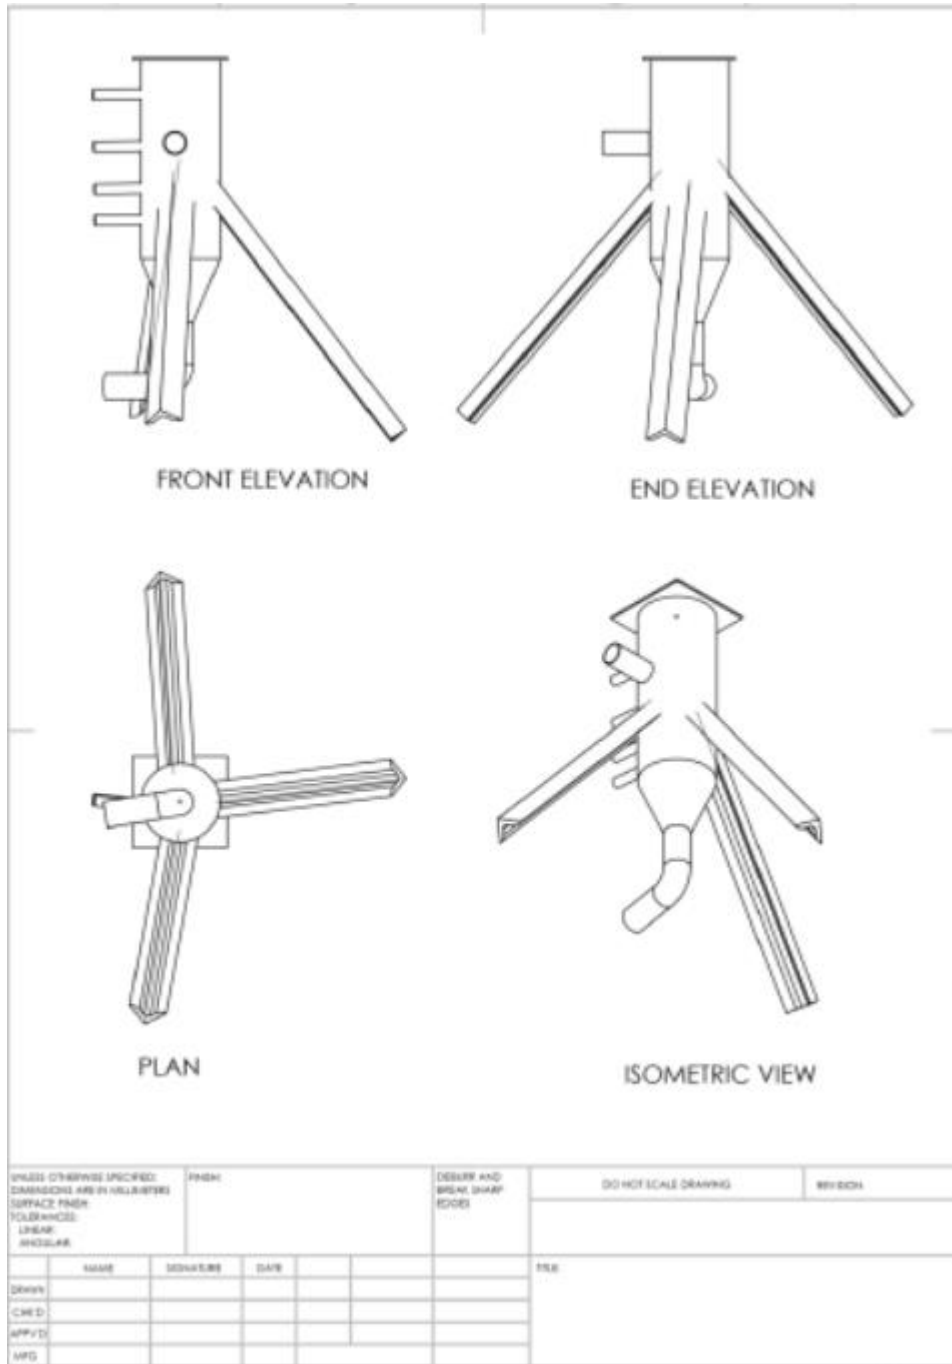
Fluidized bed combustor (Front/End/Plan elevations and isometric view)
